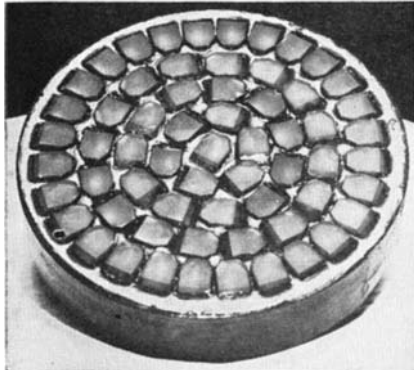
Block of end faces ready for polishing on machine. Widdicomb
